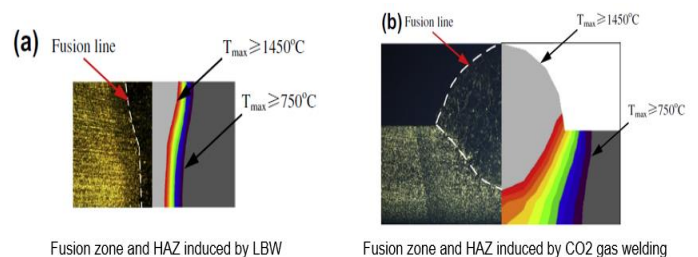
(a) Zones induced by LBW (b) Zones induced by CO₂ gas arc welding [6]
